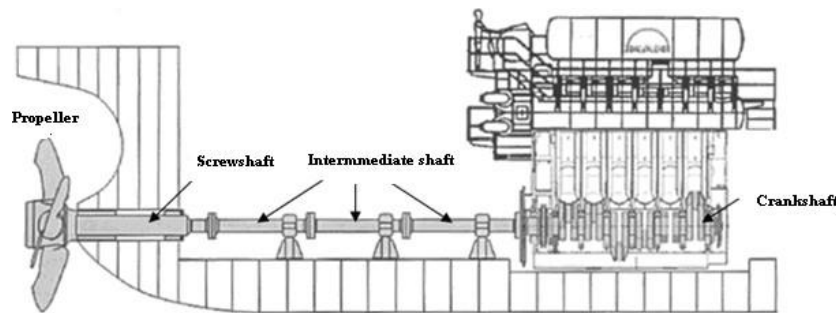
Shafting Arrangement for a Certain Container Ship
